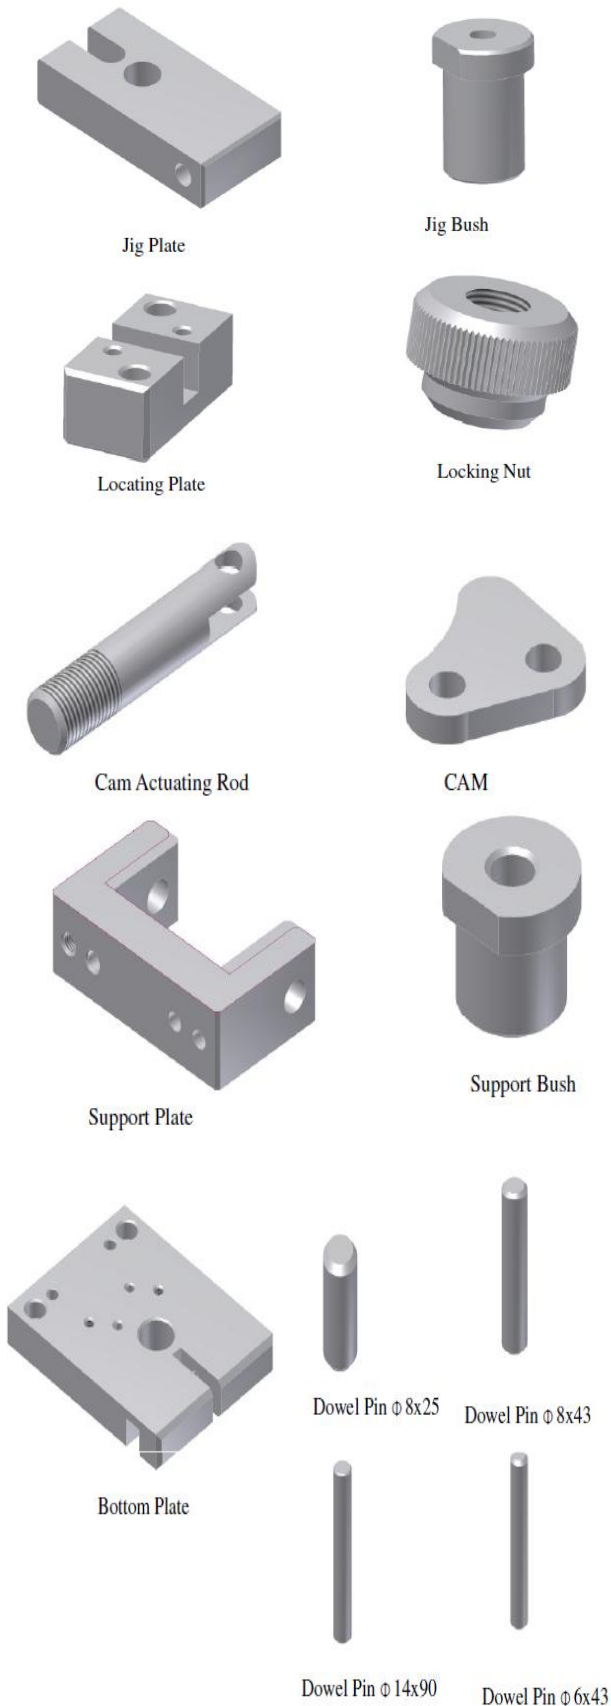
Solid Modeling of Leaf Jig-Parts of Jig
